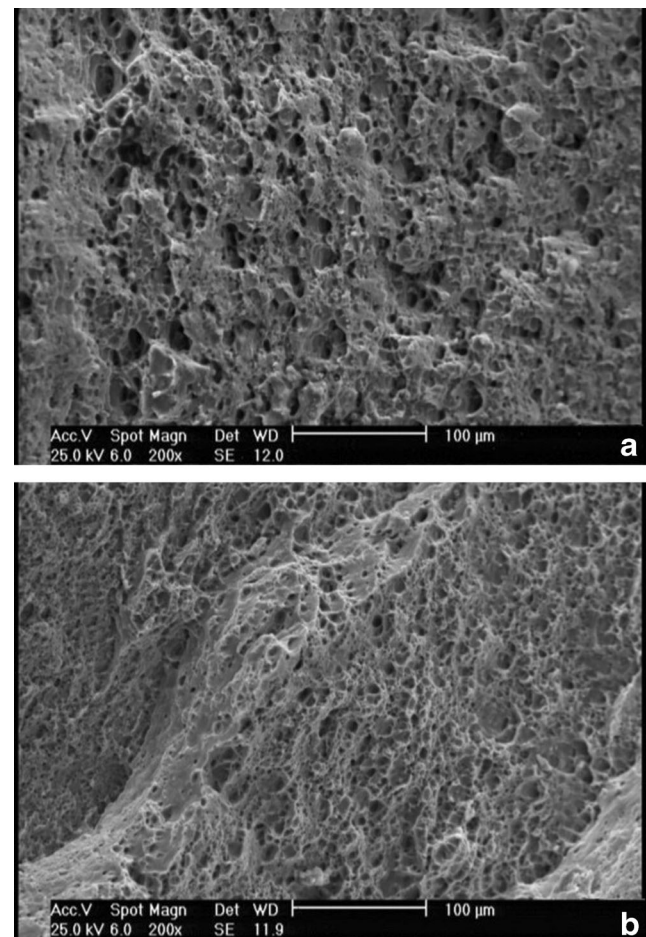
Fracture surfaces of FSV processed specimens using different frequencies: a 20 Hz and b 35 Hz
